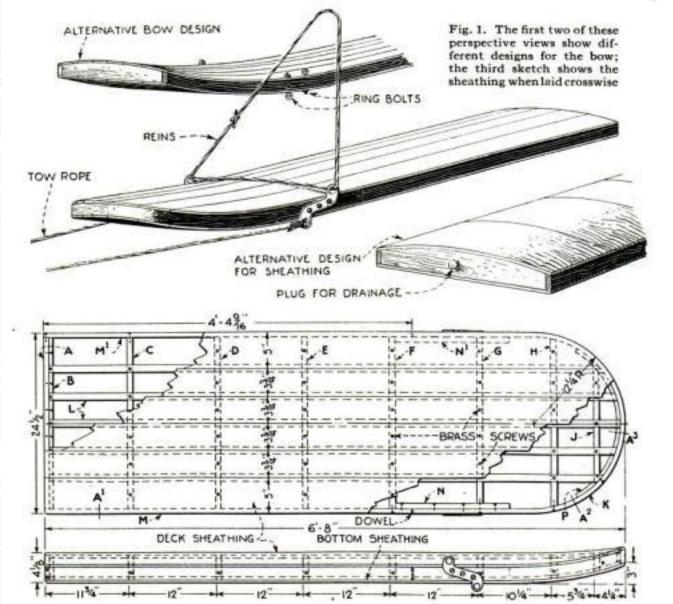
Top and side views. The construction is simpler than it looks-a series of mold boards bounded by side pieces, all braced with strips of ribbing and covered with thin wood
